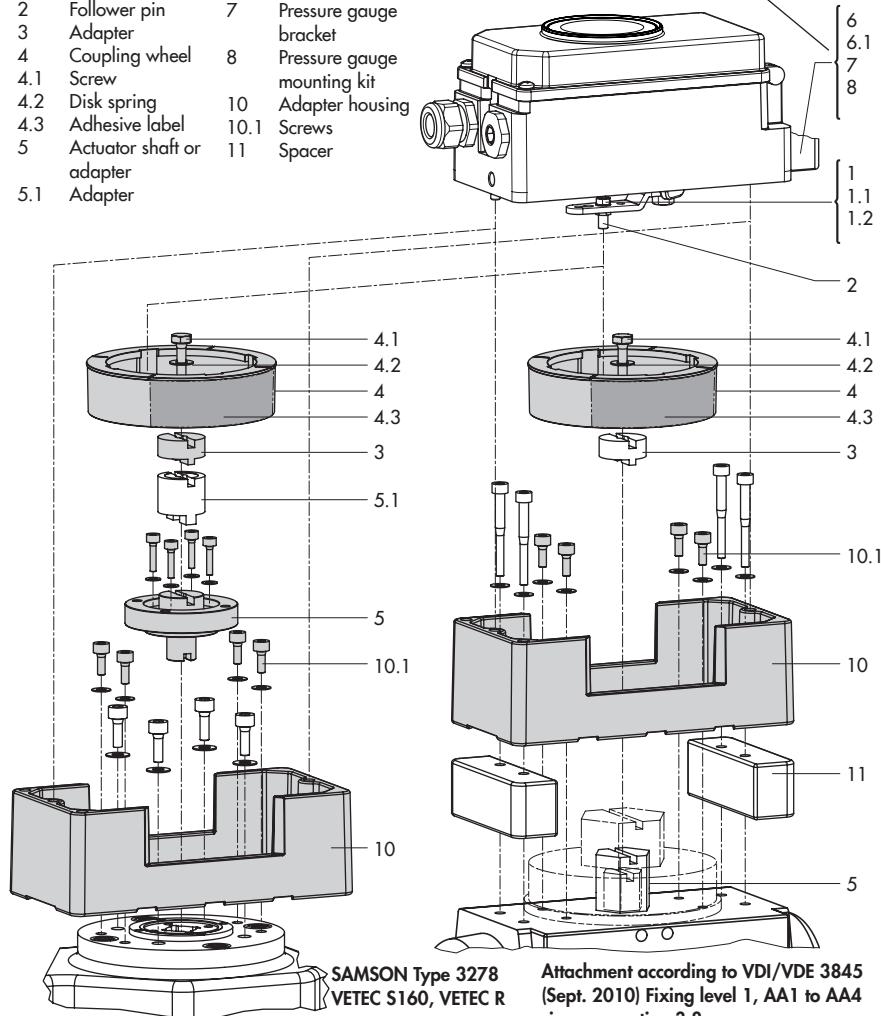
Attachment to rotary actuators (heavy-duty version)
